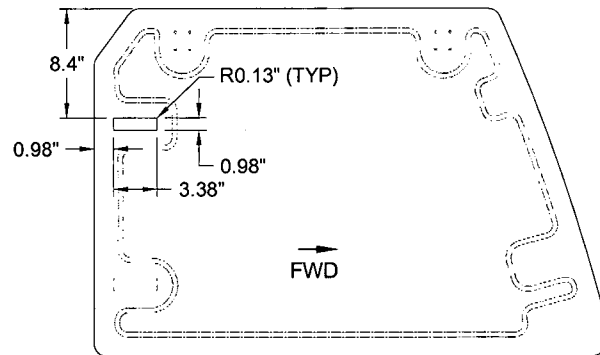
(a). D3186-1 SPACEPOD DOOR LATCH CUTOUT
